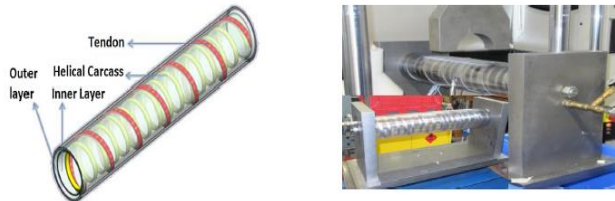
Assembly of prototype layers and specimen for bending test [30]
